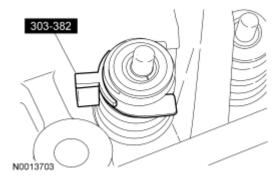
Installing Camshaft Roller Follower Courtesy of FORD MOTOR CO.
